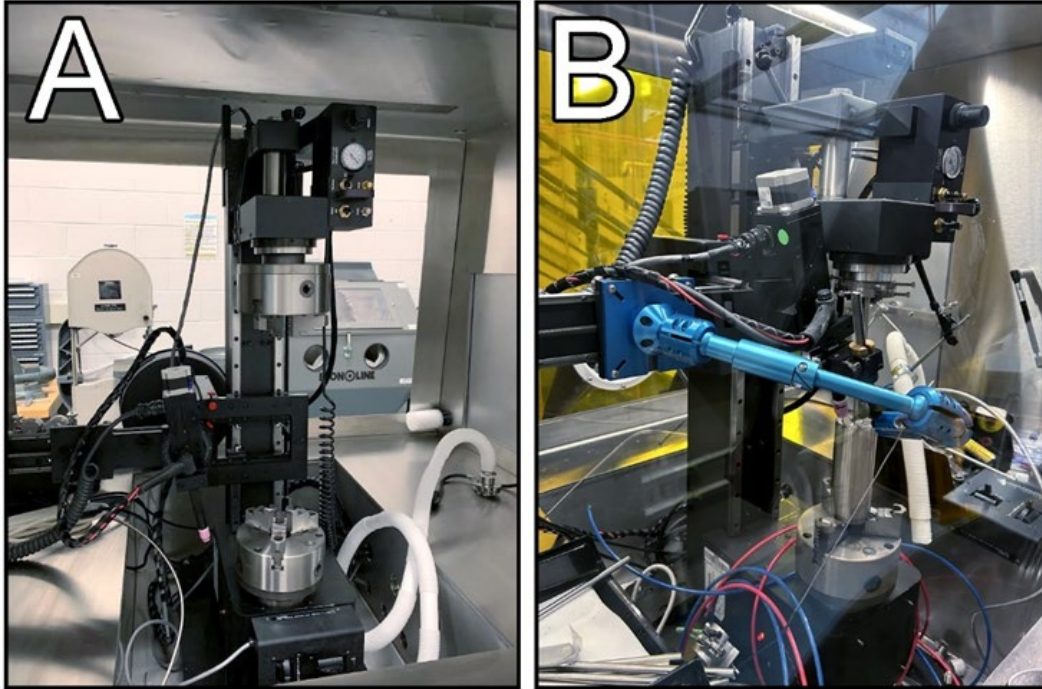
Automatic vertical welder before installation (A) and after (B), sealed inside the Ar gas glovebox
